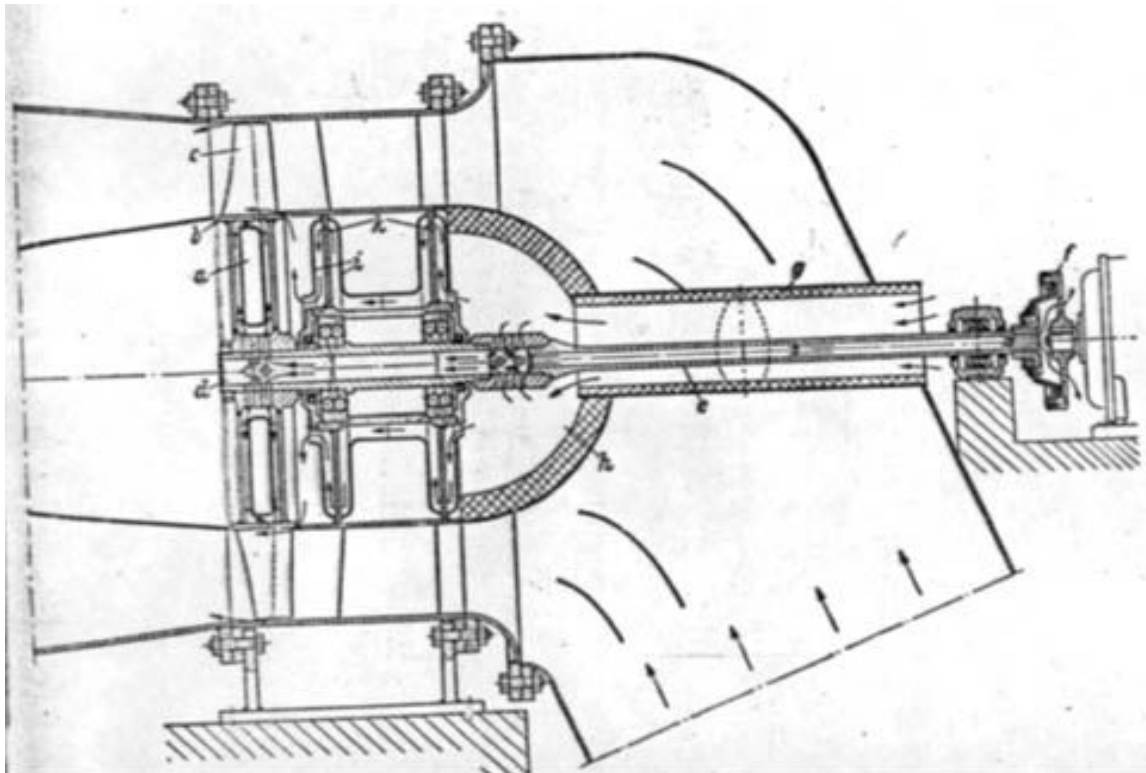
Cooling bearings in the hub of an axial flow fan (Mabag, Sulzbach) a, displacing member, dividing cooling impeller in two parts; b, hub cylinder of the axial flow impeller; v, axial flow fan blades; d, hollow space in shaft through which the cooling air is sucked; e, hollow supply shaft; f, coupling; g, shaft cover; h, hub cover; I and K, passage walls.
